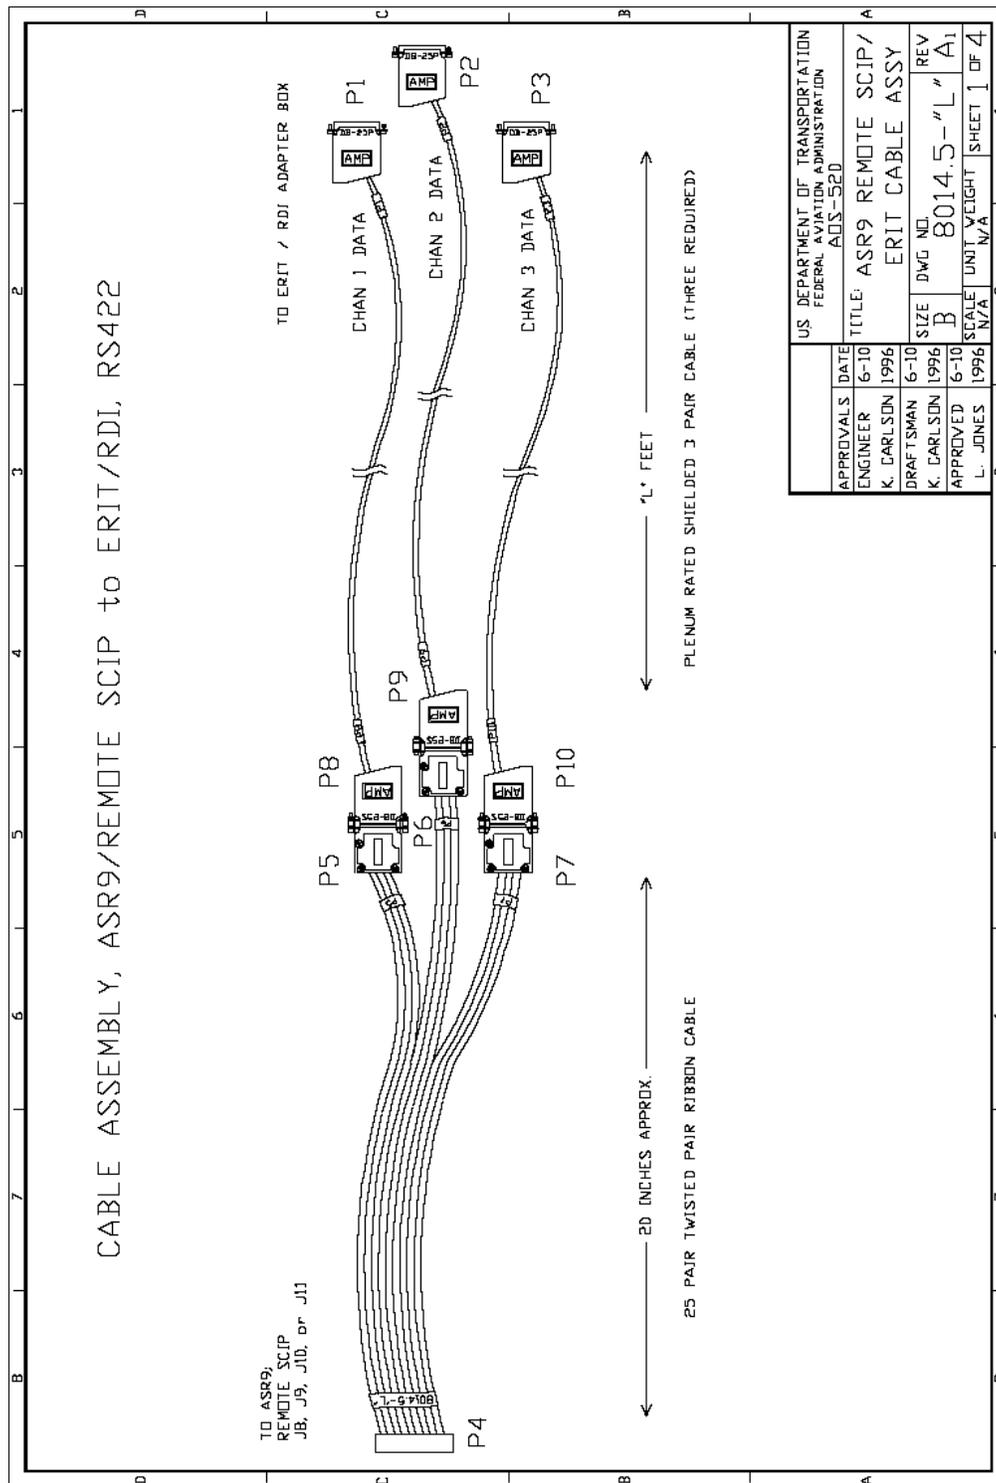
RIT V4: ASR-9 REMOTE SCIP TO RDI CABLE (SHEET 1 OF 4)
